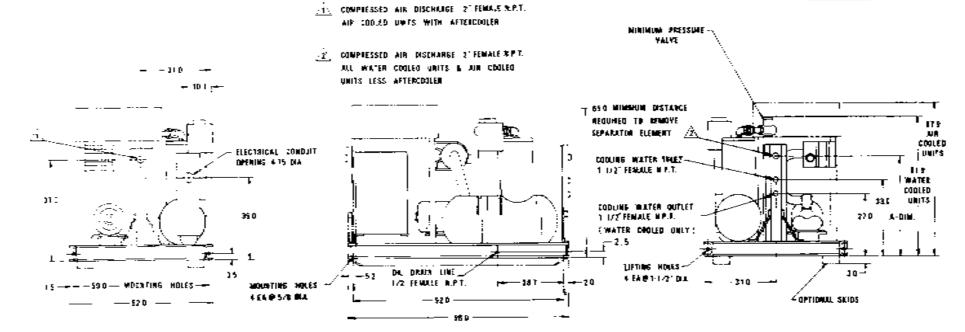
Installation Drawing TA and RCS-300 thru 480 'B' Models
